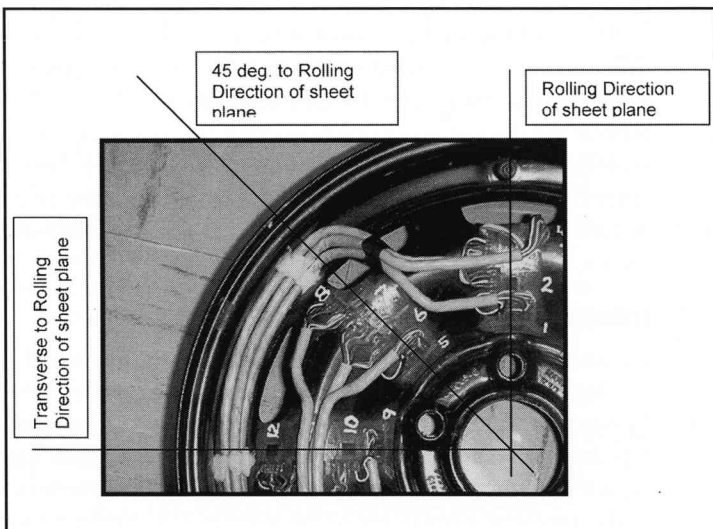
Section of guaged wheel used for assessing the maximum tensile principal stresses
